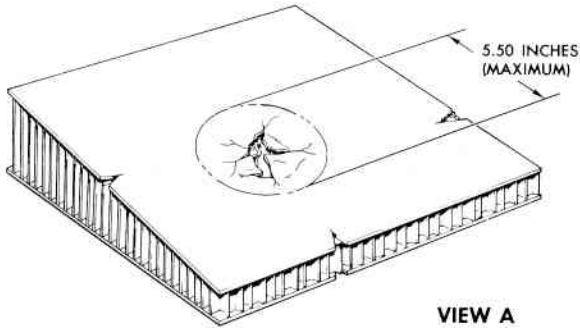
Honeycomb Repair No. 16 — Hole (Sheet 3 of 3)
